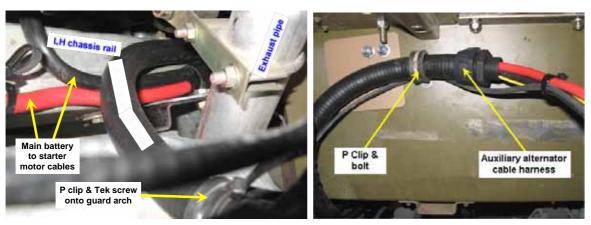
Securing the Front and Rear of Auxiliary Alternator Harness
